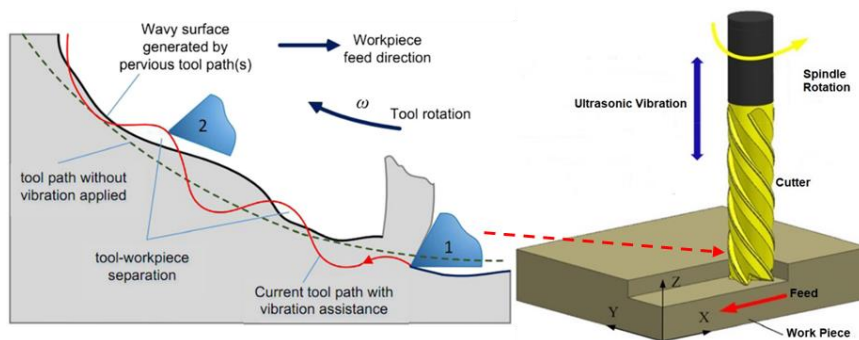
Mechanism of the ultrasonic-assisted axial milling[38].
